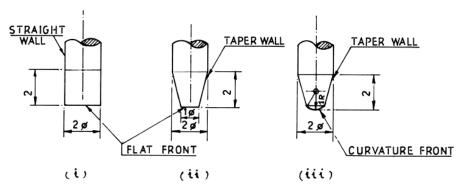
Different geometrical shapes of the tool tip (dimensions: mm)
